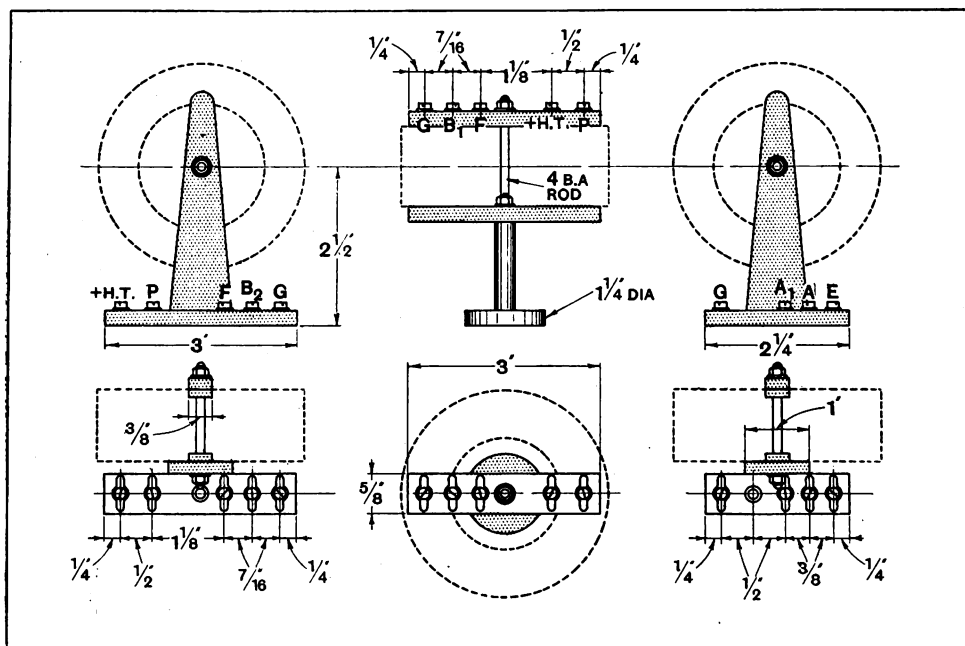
Details of the aerial coil (right) ; and the two H.F. transformers. The transformers consist of a Lewcos No. 300 plug-in type coil with primary and balancing windings. Connection strips are bolted in position and to the supports.
